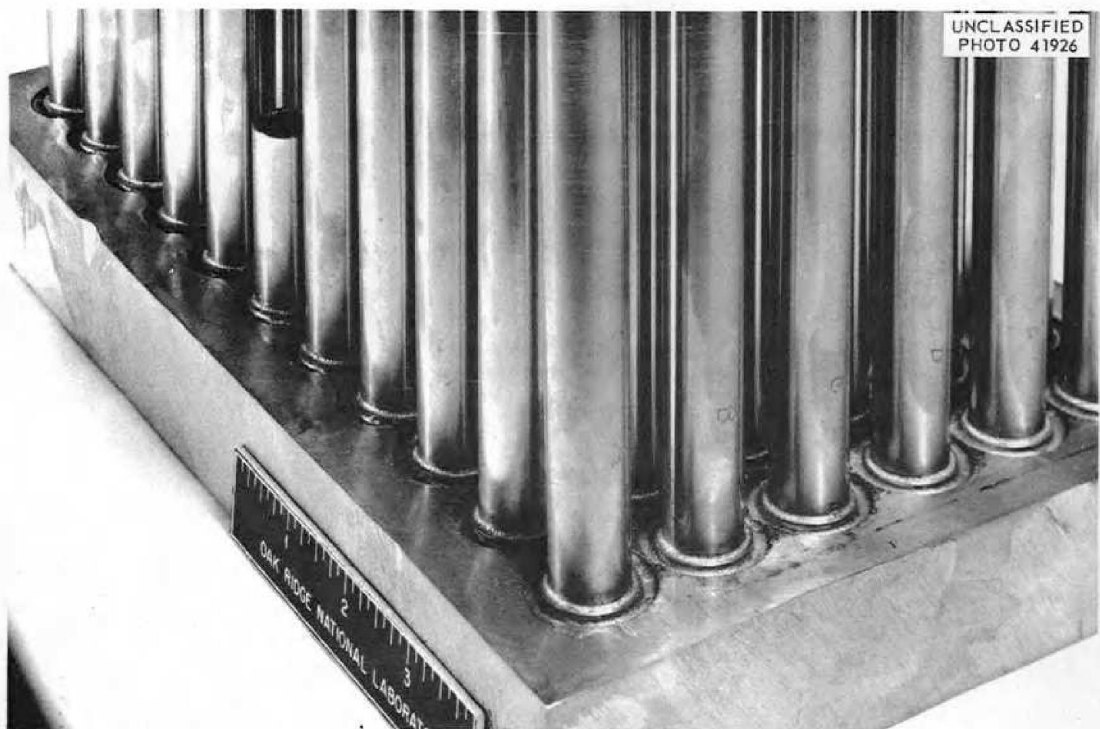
Braze Side of Fill-and-Drain-Tank Sample Showing Filletting of Trepanned Braze Joint.
